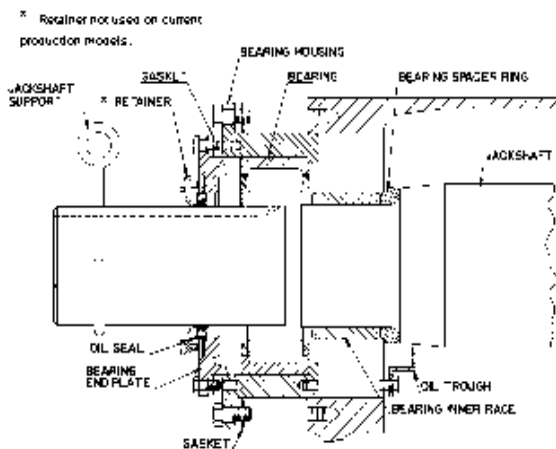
JACKSHAFT BEARING INSTALLATION
